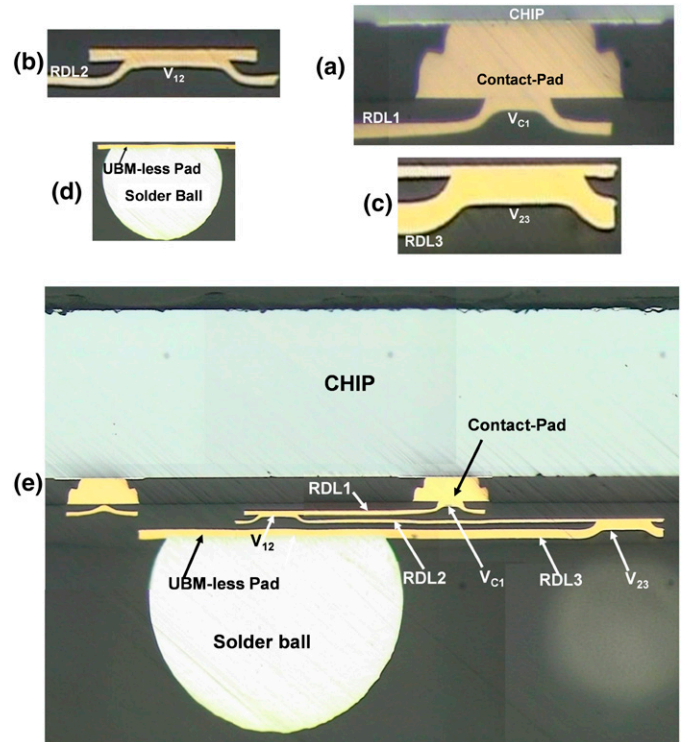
Cross-sectional image of the assembled fan-out wafer-level package with three RDLs. (a) Chip, V_{c1} , and RDL1. (b) V_{12} and RDL2. (c) V_{23} and RDL3. (d) RDL3, UBM-less pad, and solder ball. (e) A combination of (a–d).
